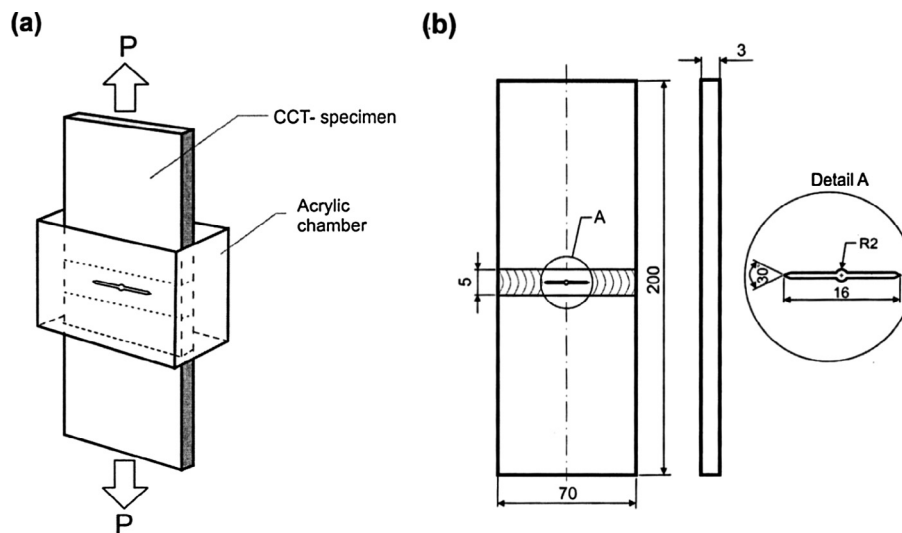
An experimental set-up for corrosion fatigue test with a CCT-specimen.
